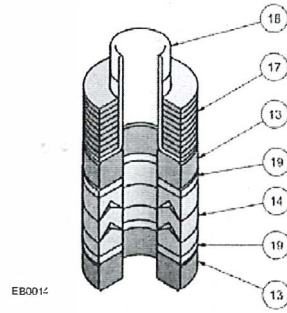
, Table 9. ENVIRO-SEAL® PACKING KIT P/N 24490T001
